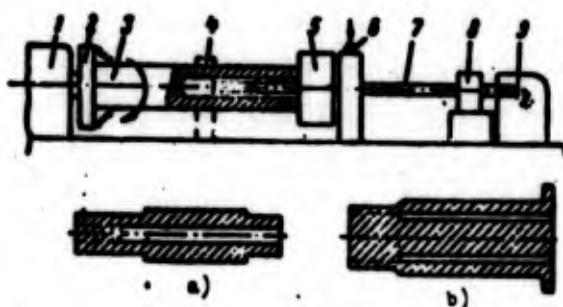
Diagram of deep drilling; 1 - headstock of the machine; 2 - face plate; 3 - shaft to be treated; 4 - rest; 5 - oil receiver; 6 - feed of liquid coolant; 7 - drill; 8 - passing carriage; 9 - shaving receiver.
